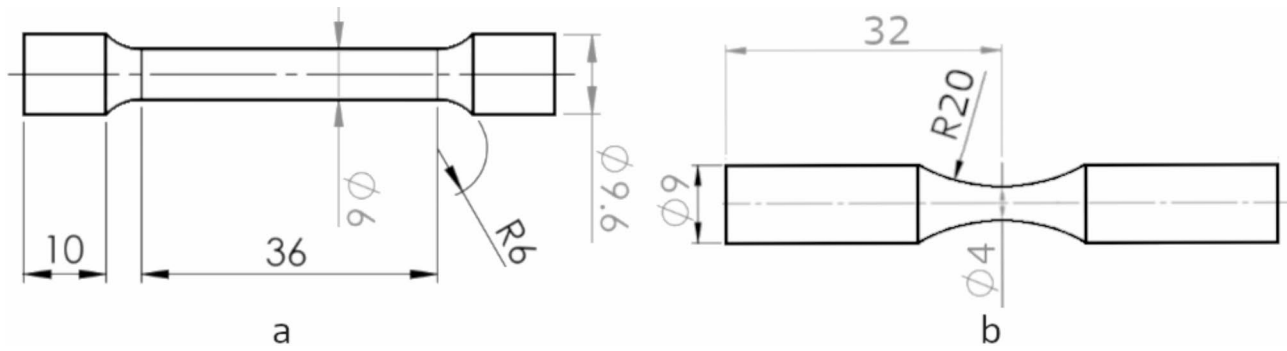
Illustration of the tensile test sample (a) and the fatigue test sample (b), with dimensions provided in millimeters.
